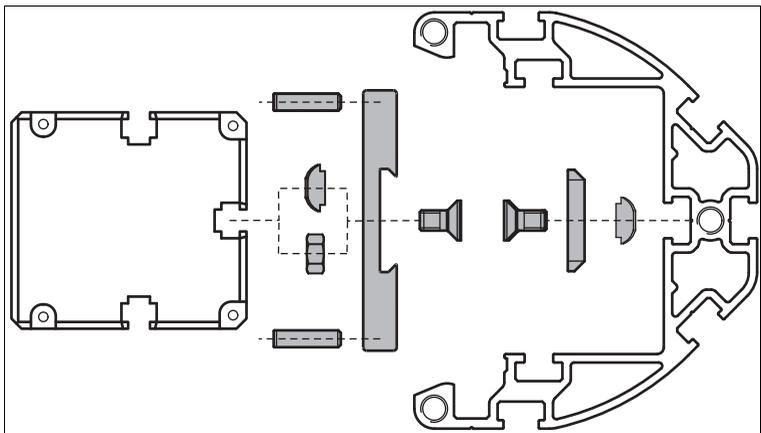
Assembling or disassembling using mounting aid OMH-SLCT-11
